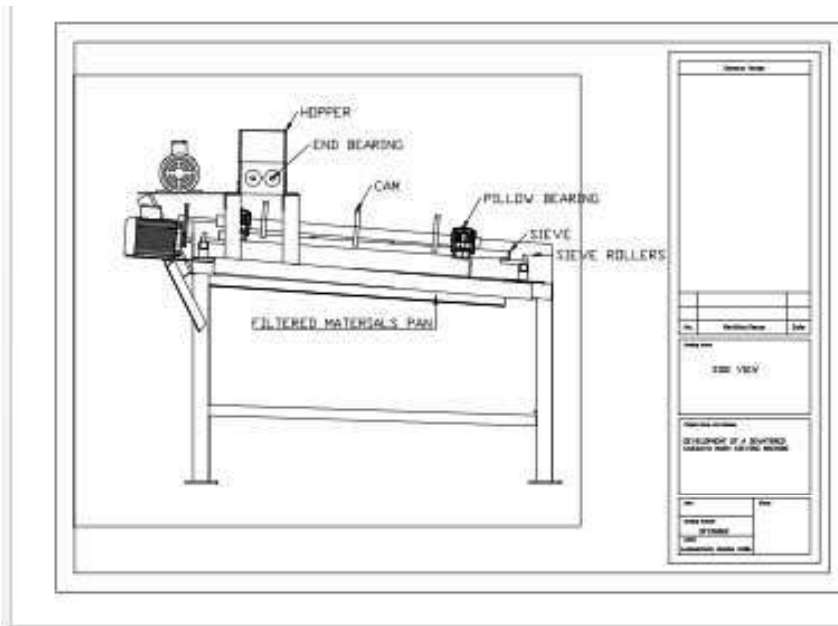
Side View Elevation of Dewatered Cassava Mash Sifting Machine
